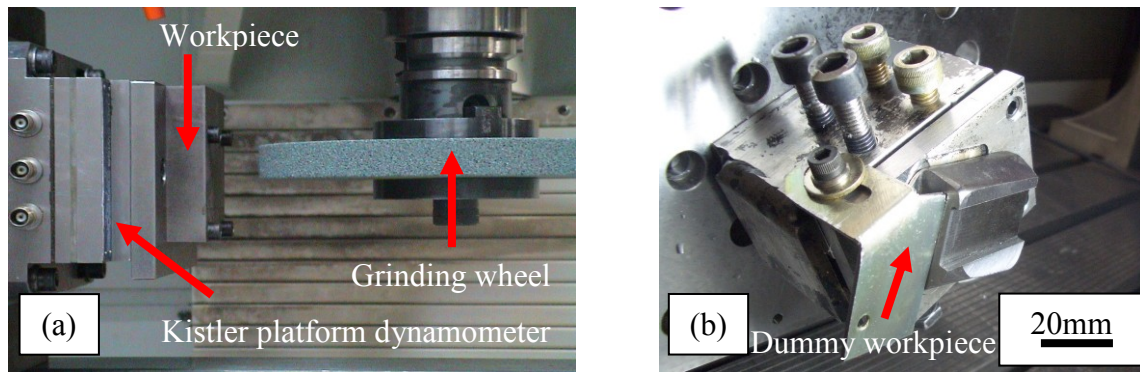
Grinding arrangements (a) γ -TiAl and Ti-6Al-4V (b) BuRTi workpieces
